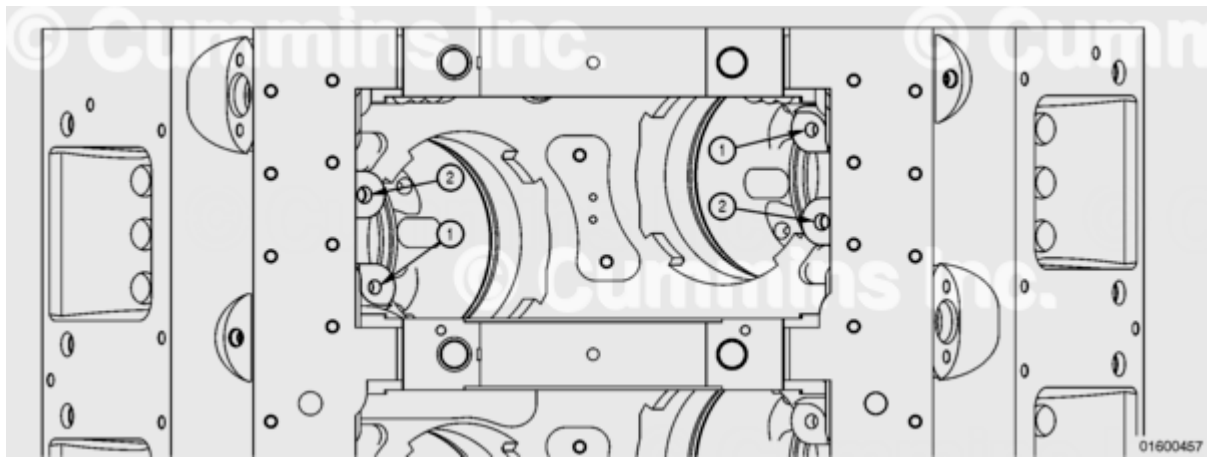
Lower Piston Cooling Nozzle Reference Point (1) Primary Datum Reference Surface (locating pad), (2) Mounting Pad.
